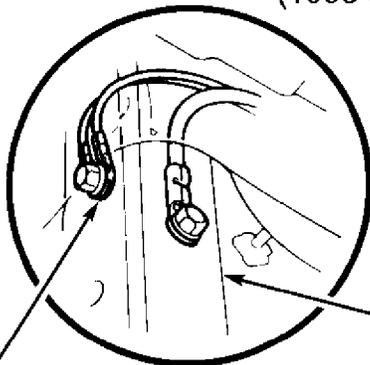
Testing A/T Gear Position Indicator (1994, 3 of 3)
